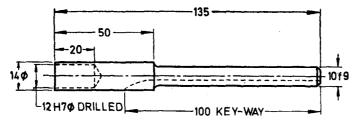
DIMENSIONS FOR OUTER CASING END FITTING (PRIME MOVER END) FOR TYPE A FLEXIBLE SHAFT ASSEMBLY
